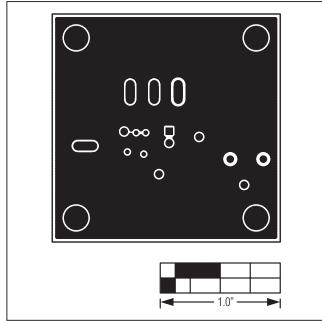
MAX97200A EV Kit PCB Layout—Solder Side
